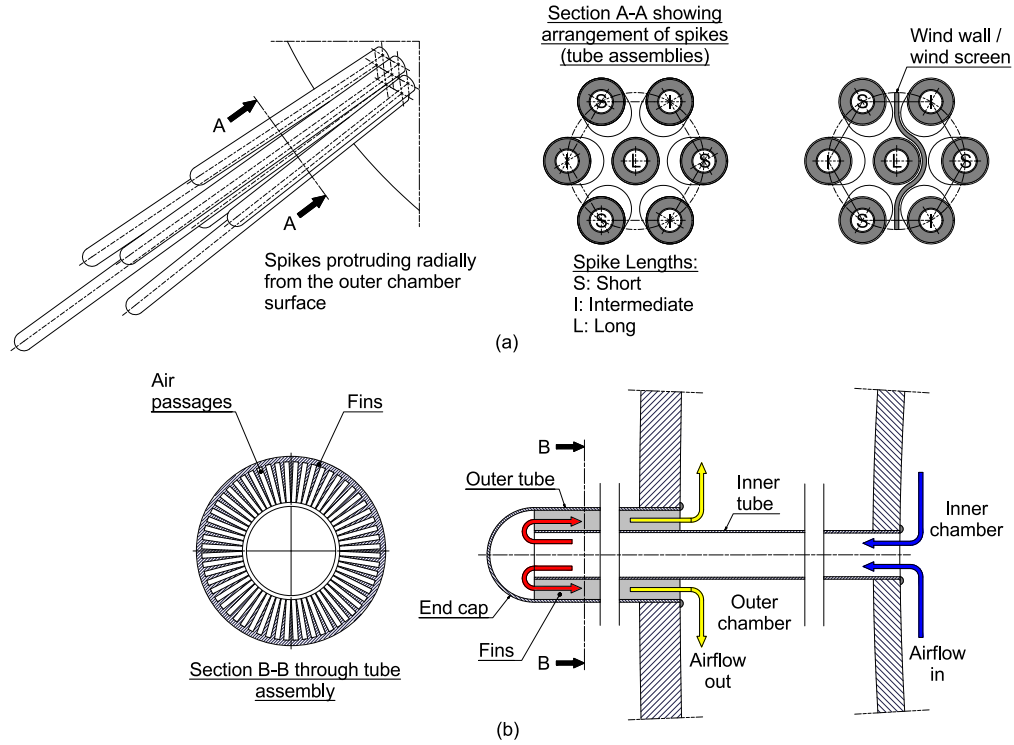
SCRAP tube assembly (spike) details: (a) tube arrangement, (b) tube geometry
